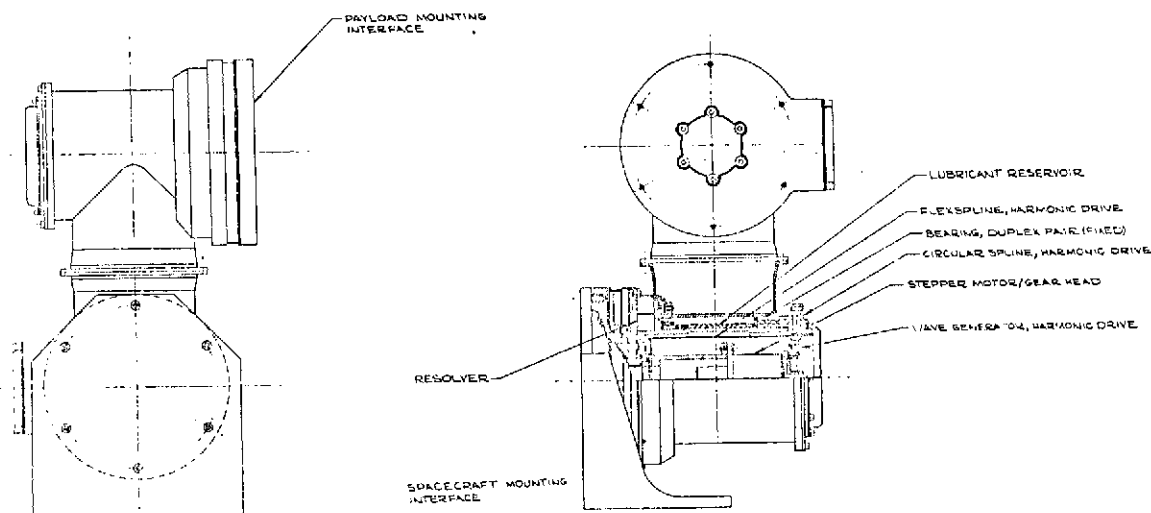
Antenna Gimbal Assembly Layout (Unit)
